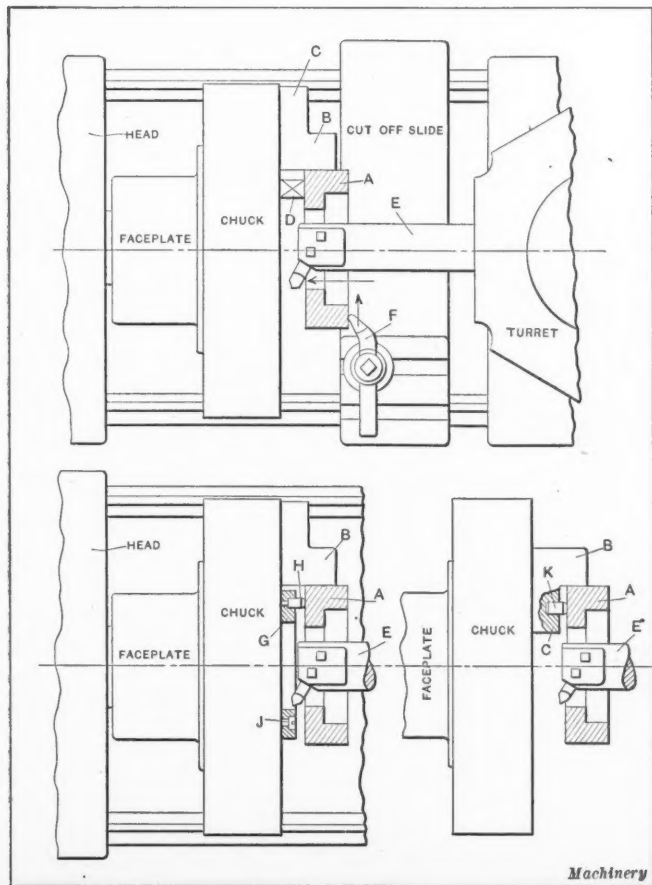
Three Methods of holding Forged Steel Clutch Ring to be machined on Horizontal Turret Lathe
